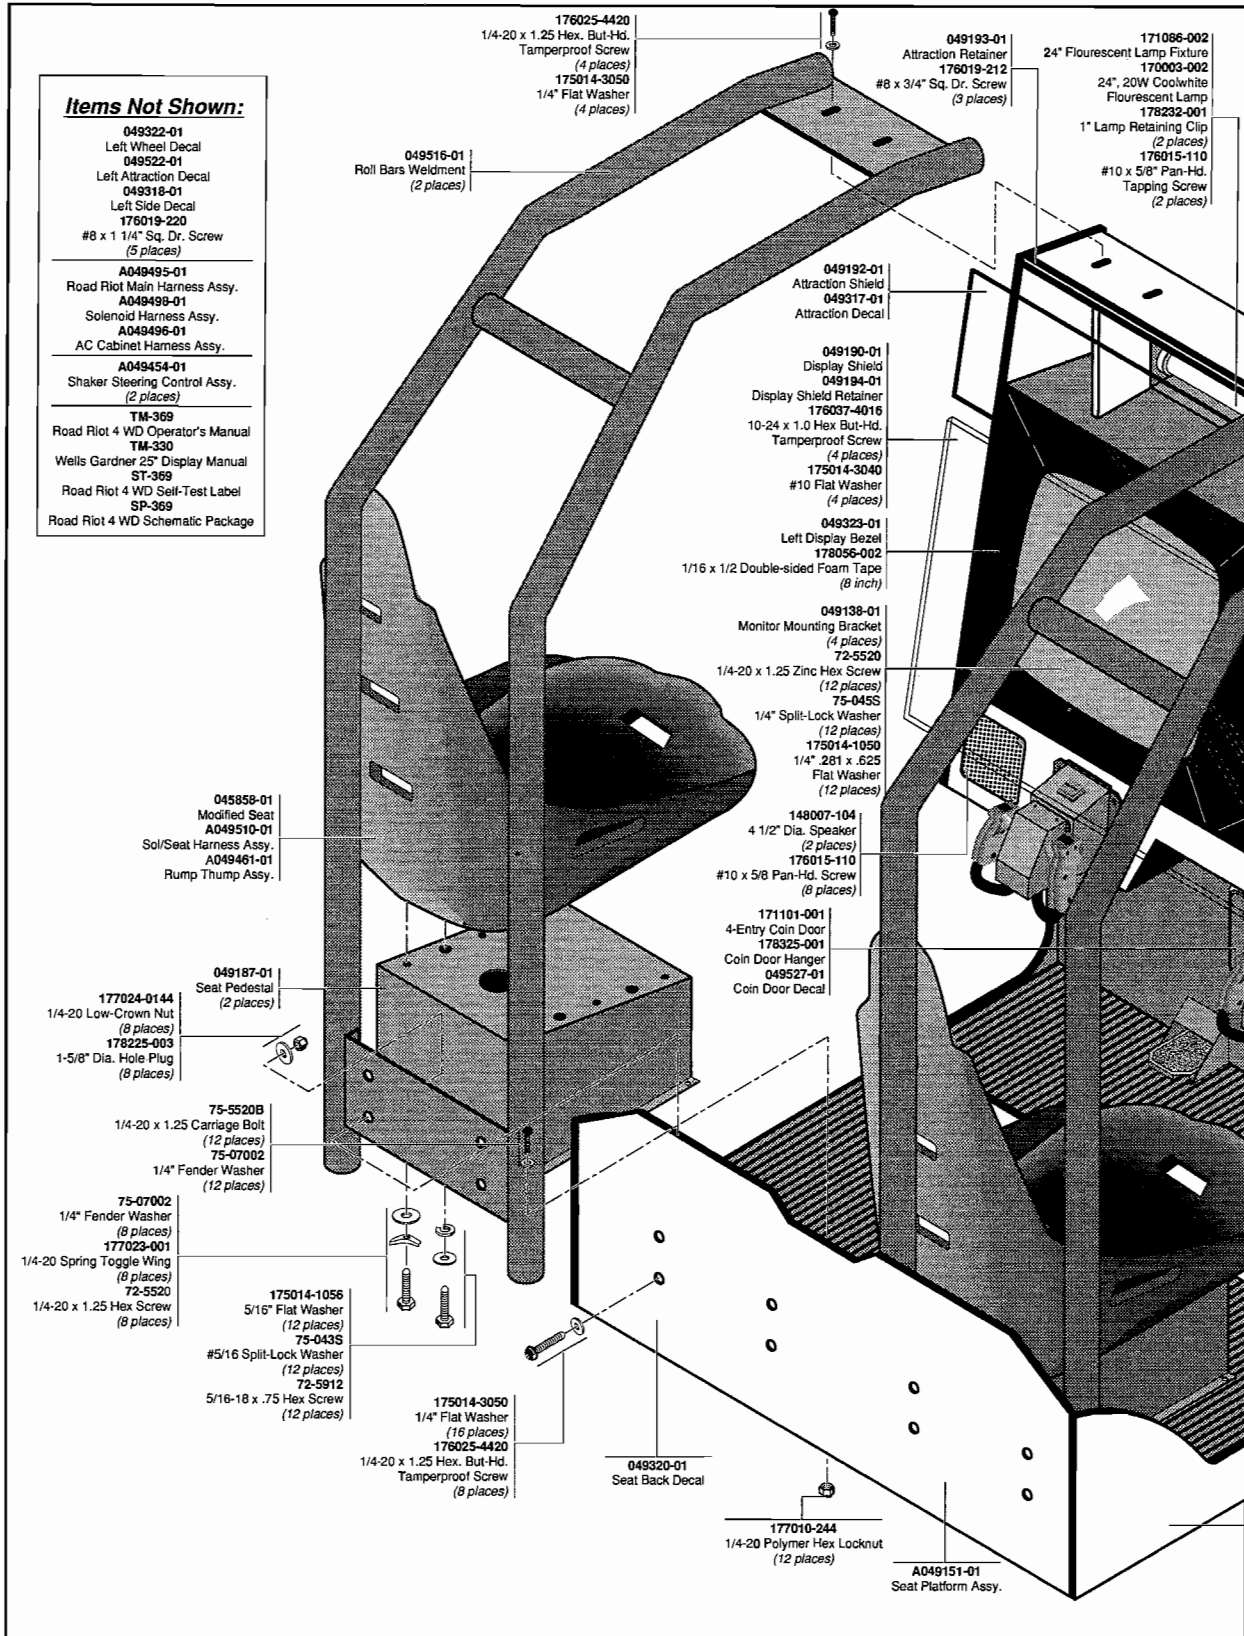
Cabinet-Mounted Assemblies, Front View
